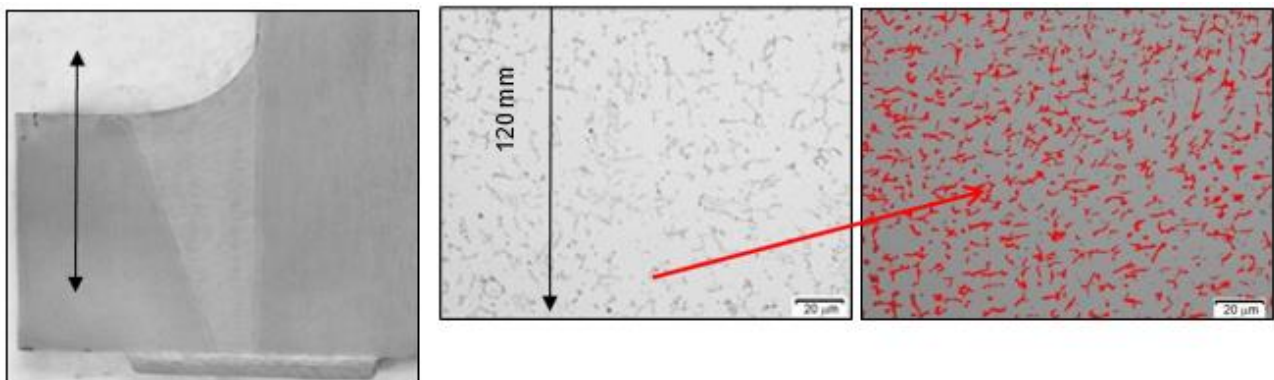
Macros of weld 4 with evaluation of delta ferrite content using image analysis in austenitic weld deposit
